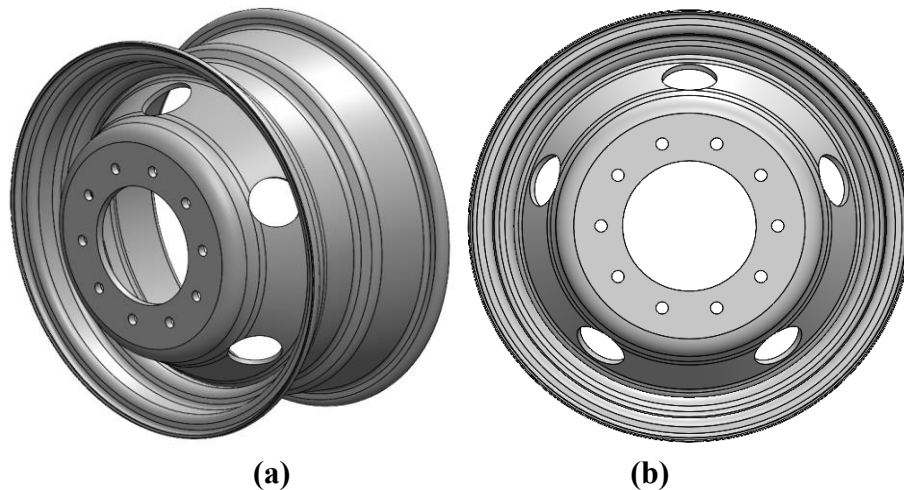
3-dimensional views of wheel: (a) Isometric view, (b) Top view
